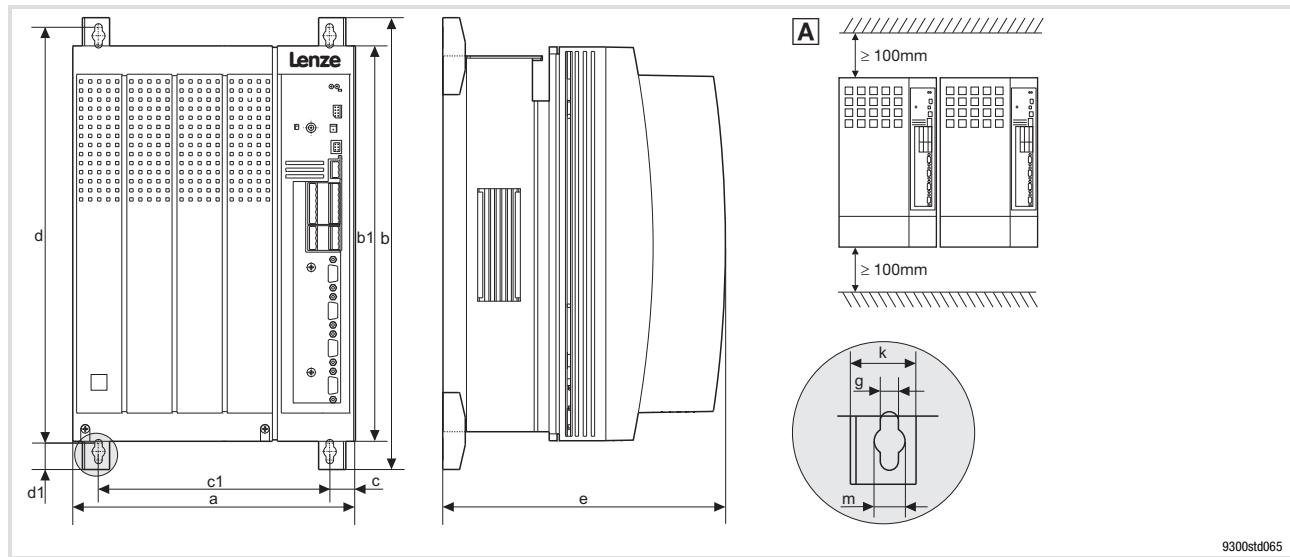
Standard mounting with fixing brackets 15 ... 30 kW
